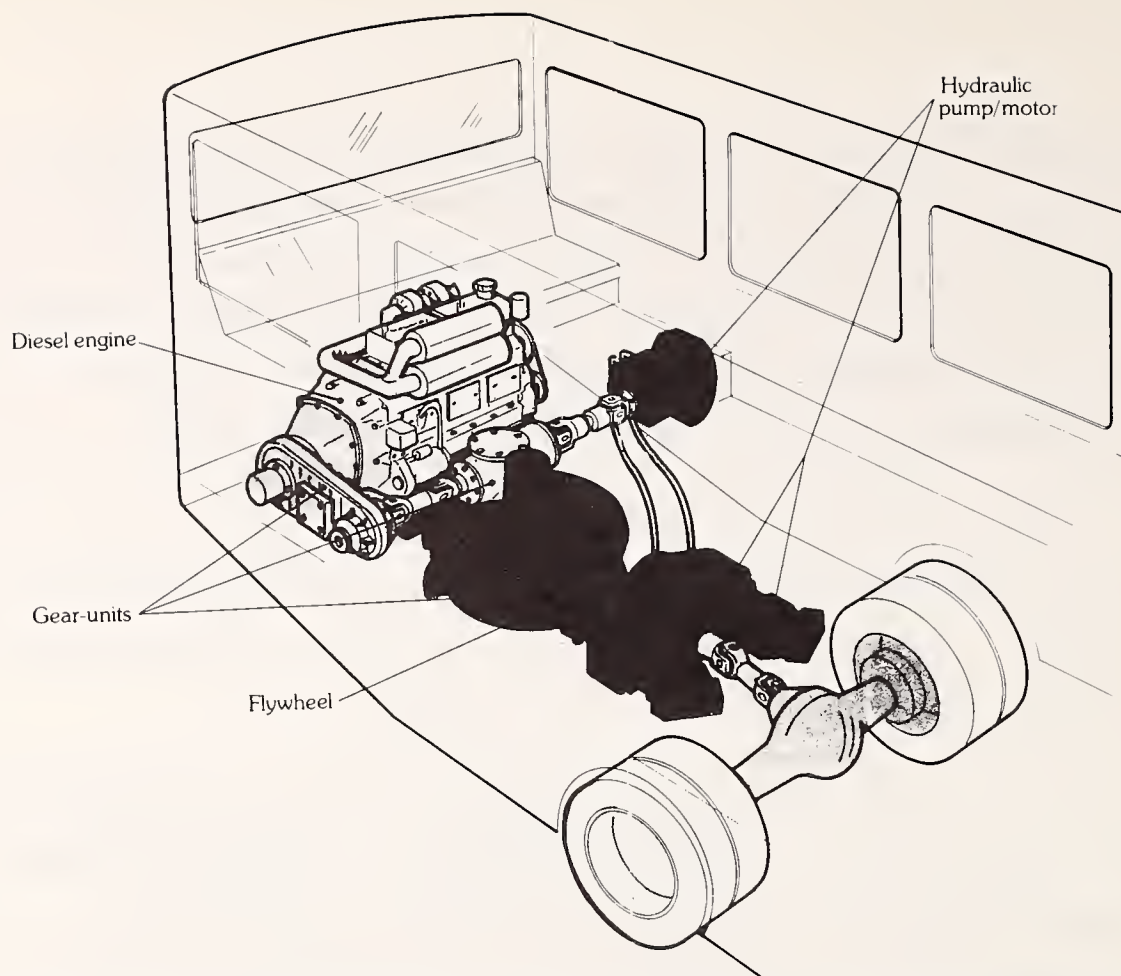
DRIVELINE CONFIGURATION OF VOLVO DIESEL/FLYWHEEL DESIGN
